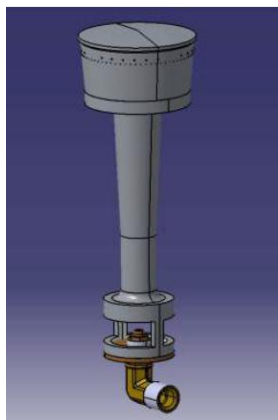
The technical drawing of the burner using hydrogen as fuel in a commercial cooker.
